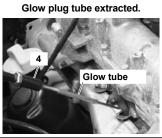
Extracting the glow plug tube, using slide hammer puller (accessory).
